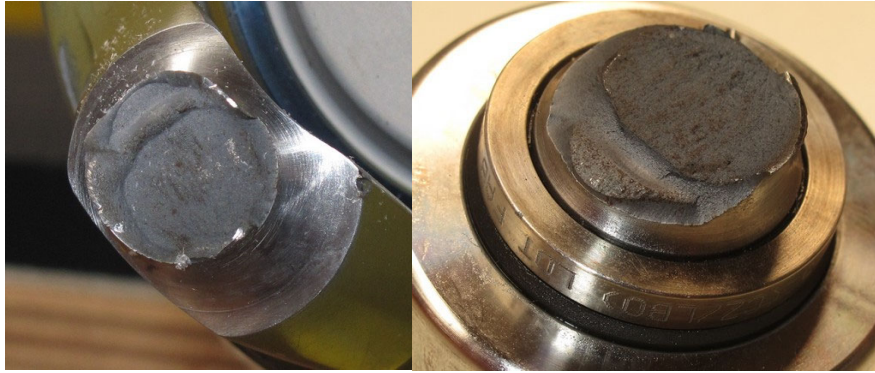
Trunnion pin fracture surface (on left, tulip side, on right, end of trunnion pin side)
